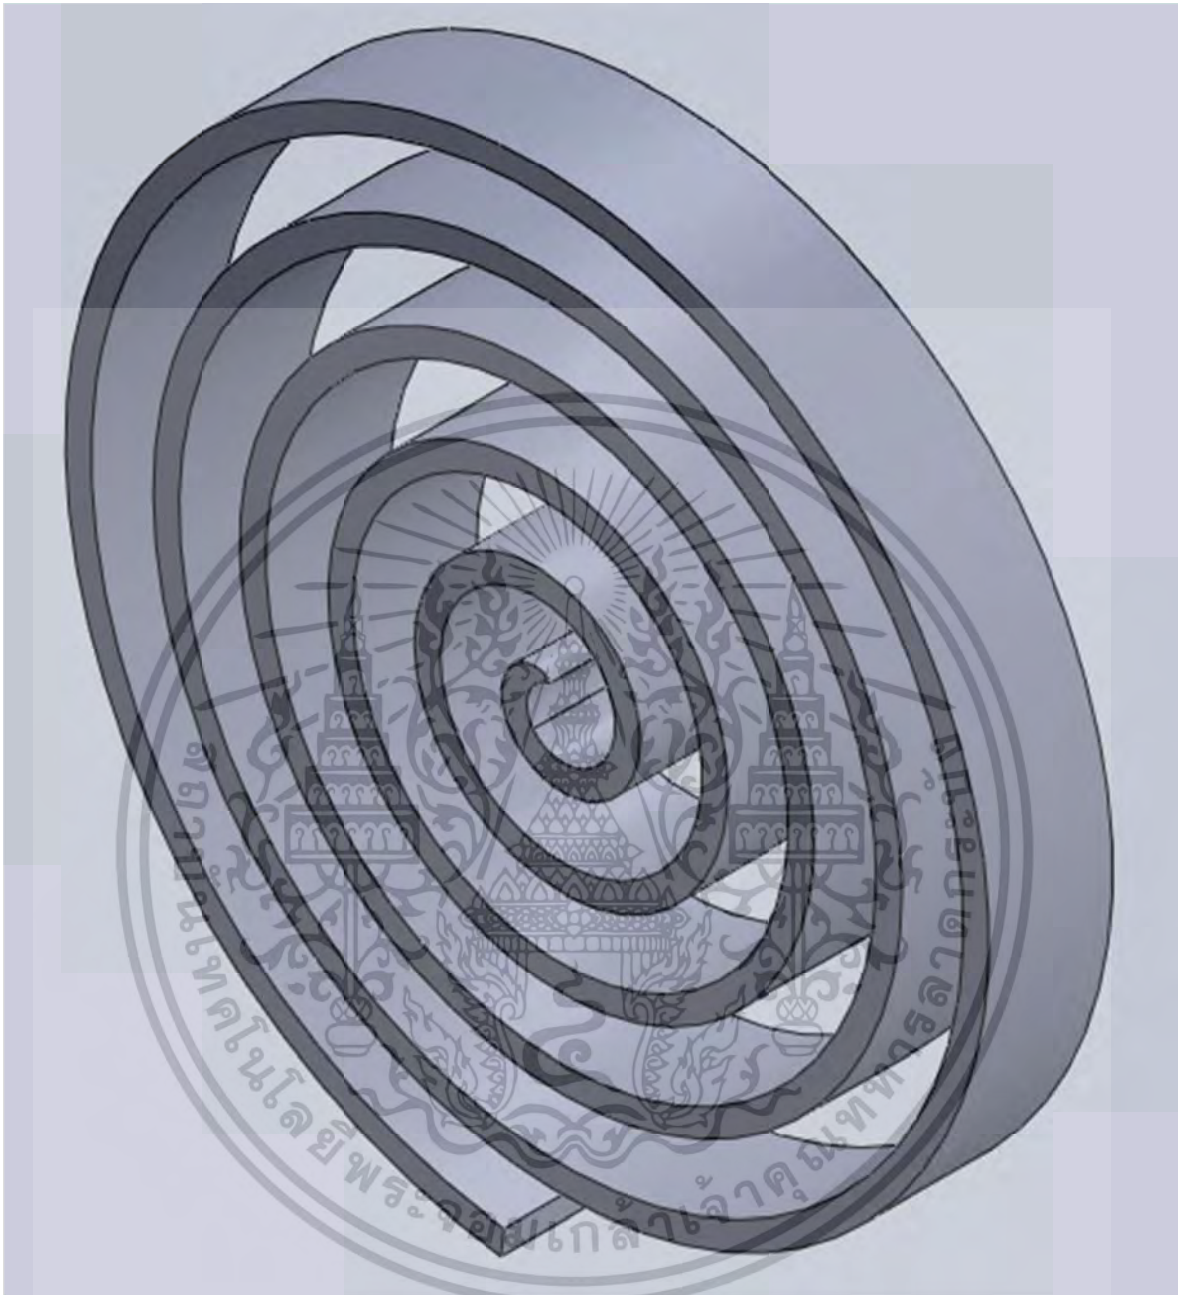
Scroll Expander Wrap in 3 dimensions
